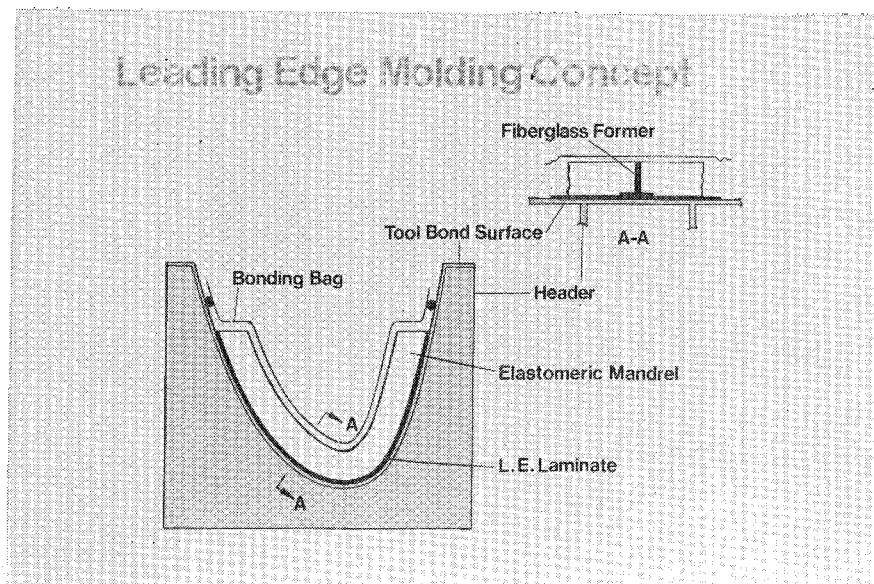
Open-Faced Elastomeric Molding of Leading Edge
